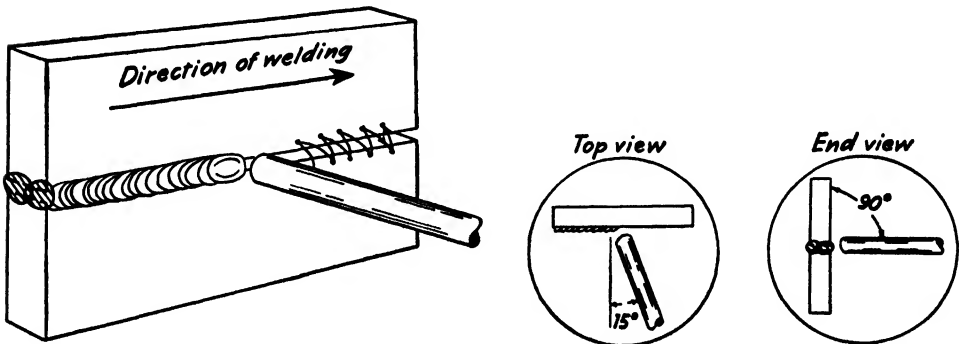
In horizontal position welding, hold the electrode horizontal but lean the top about 15 deg in the direction of welding.
